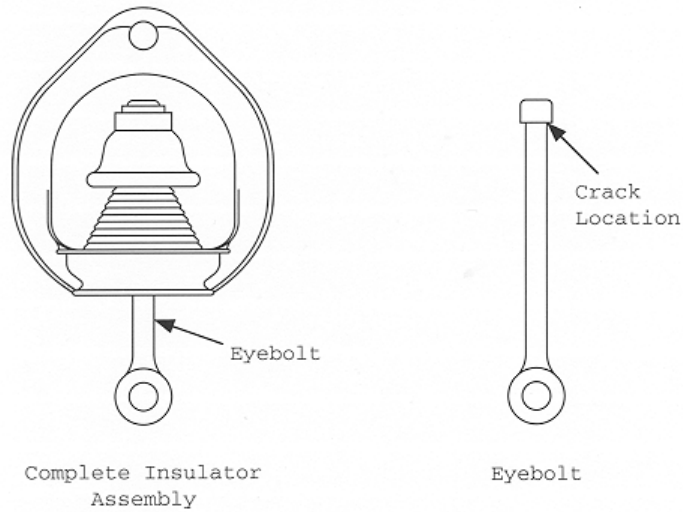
Location of fatigue failure in compression cone insulator.
